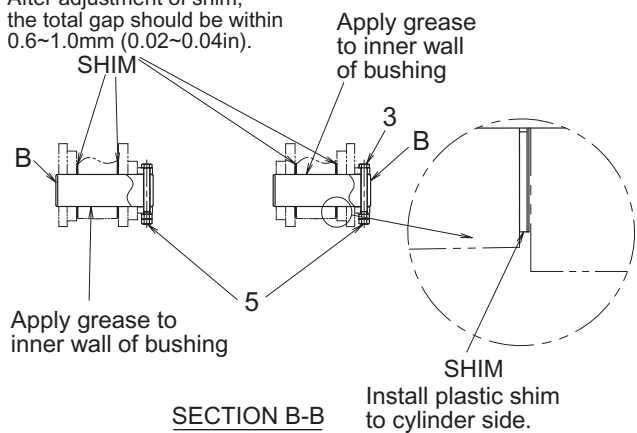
Removing and installing boom cylinder head pin (B)
